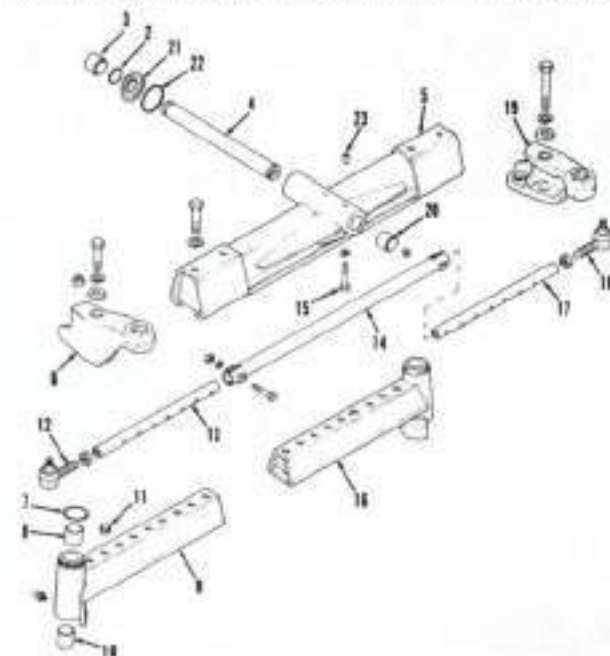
Exploded view of front axle used on late Model 1394 (P.L.N. 11504412 and after). Refer to Fig. 2 for legend.
